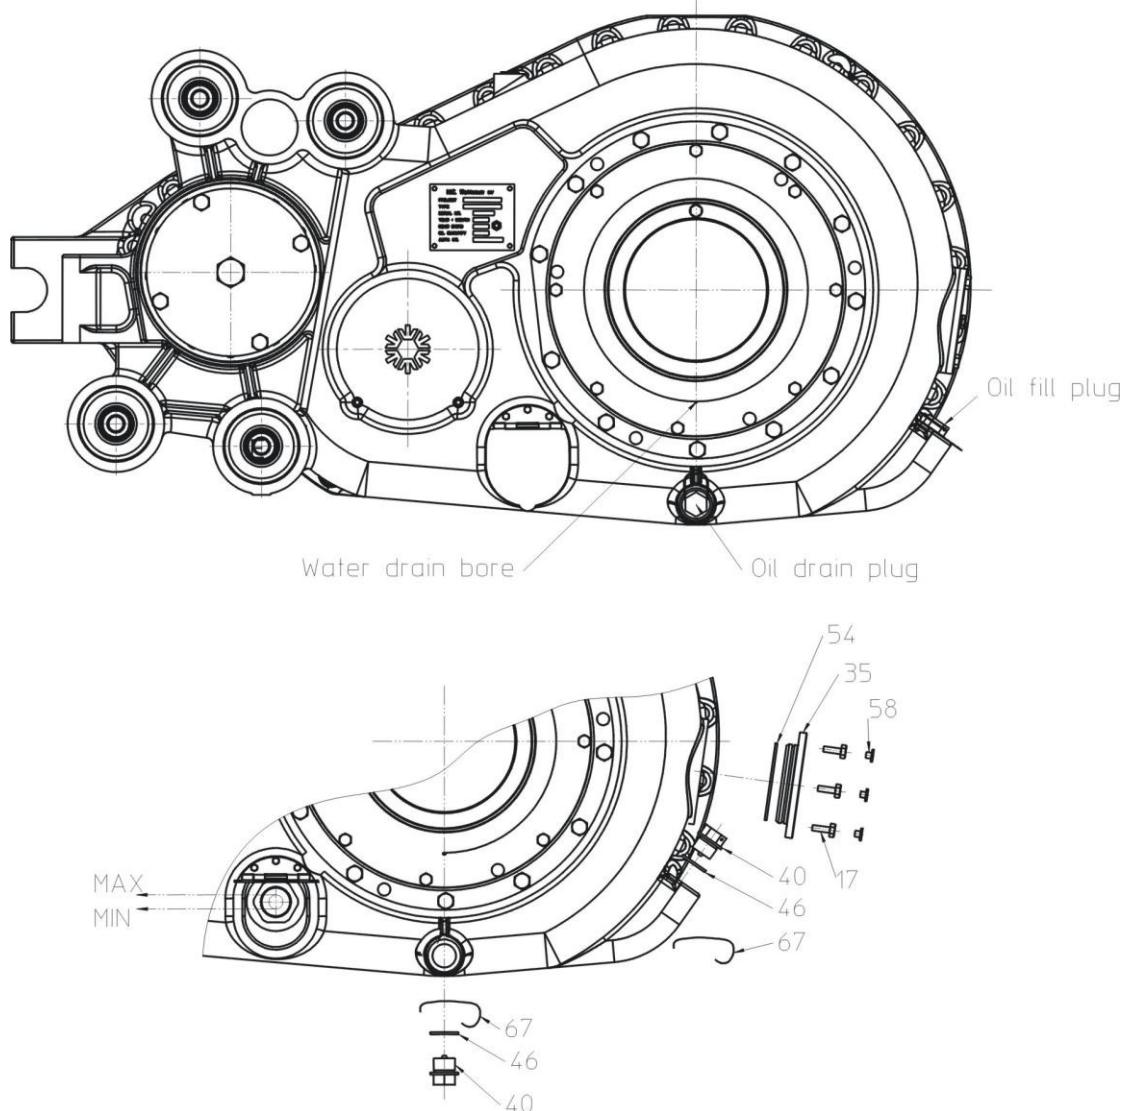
GEAR UNIT - OIL CHANGE/REFILL
